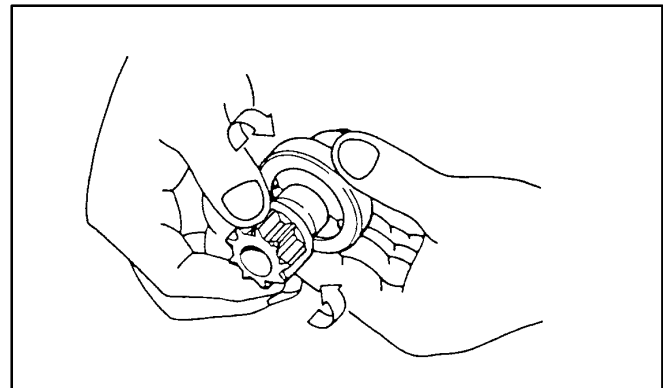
CHECKING OPERATION OF THE PINION OVER-RUNNING CLUTCH
